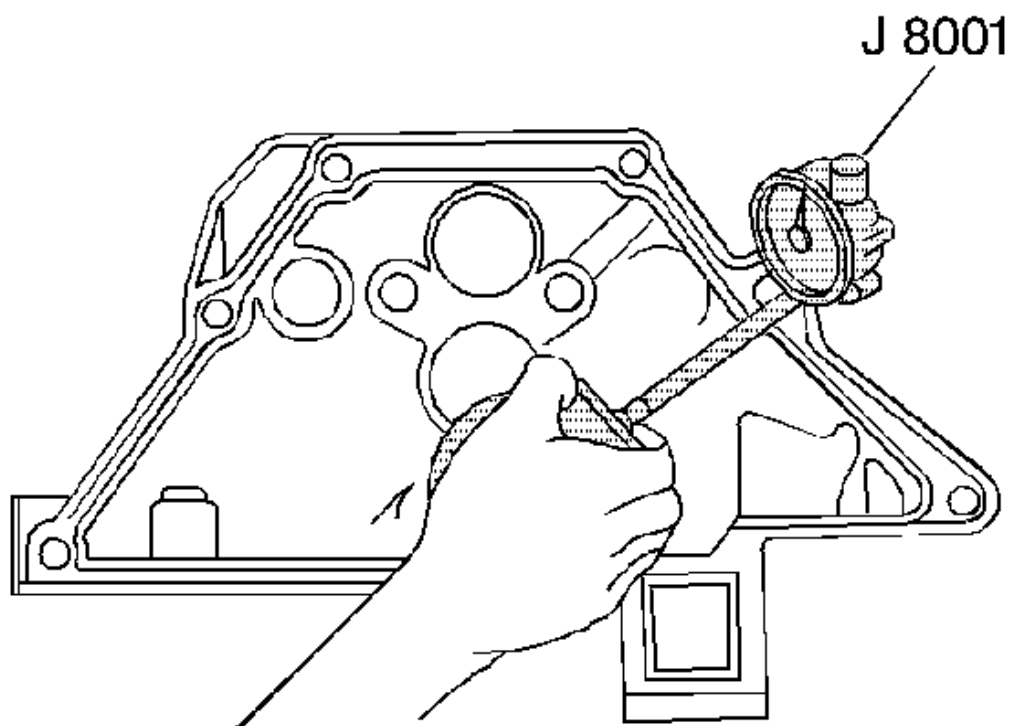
Inspect Mating Surfaces Of Transmission Case
